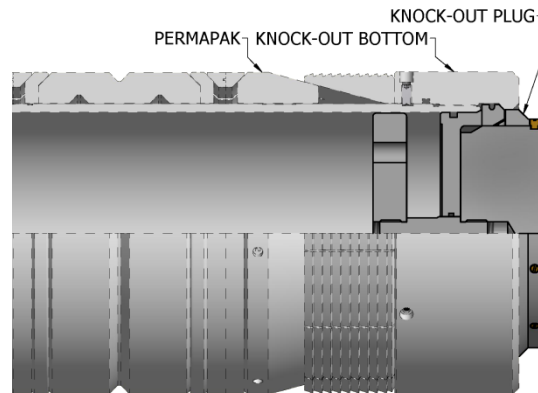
(For illustration only. Not actual packer and knock-out assembly.)
